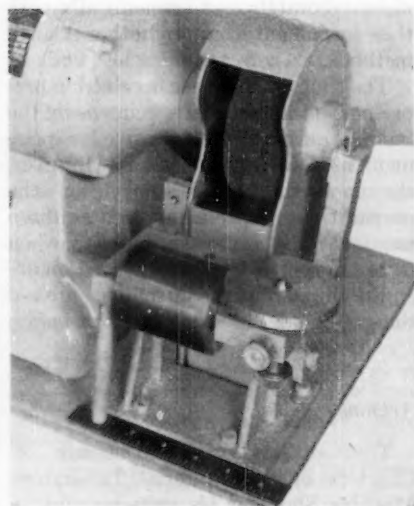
Buffing Machine for Preparing Strip Specimens.
